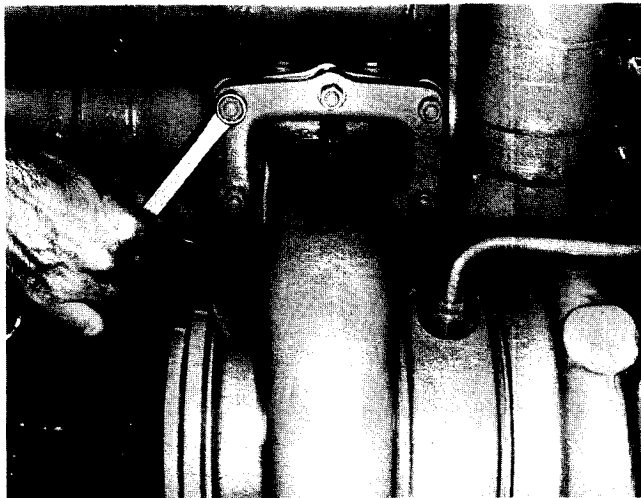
, (N11953). Tightening turbocharger mounting marks
